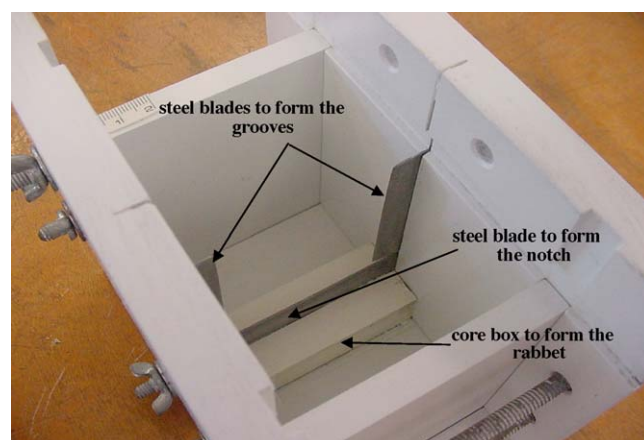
Photograph of the PVC mold, showing the steel blades to form the notch and the grooves on the test specimen during molding.
